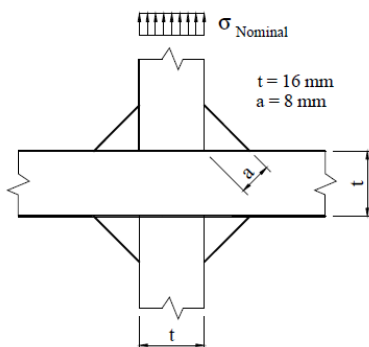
Fillet welded cruciform joint for evaluation of weld root fatigue (DNV, 2012)
